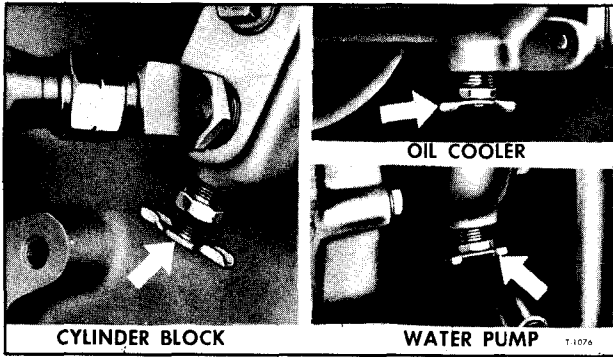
Cylinder Block, Oil Cooler, and Water Pump Drain Points (6-71 Diesel Engine)
